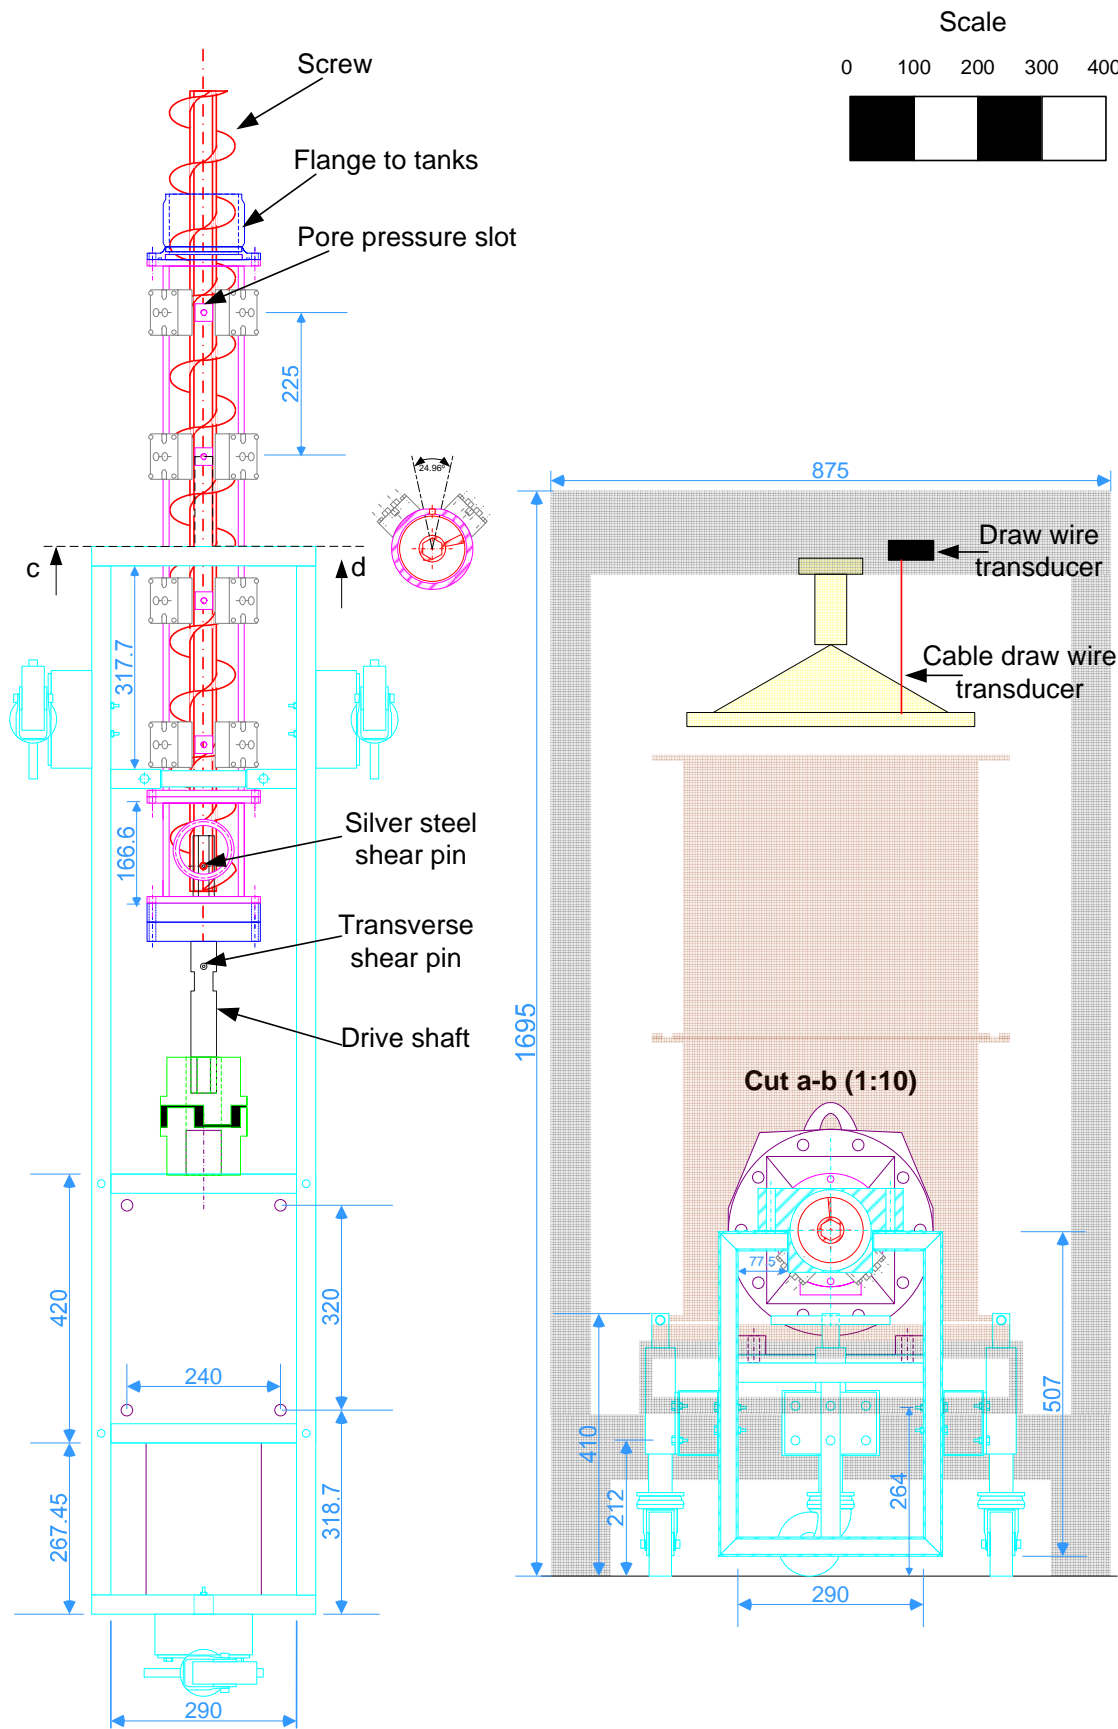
Bottom view general arrangement and cut a-b of Oxford screw conveyor
